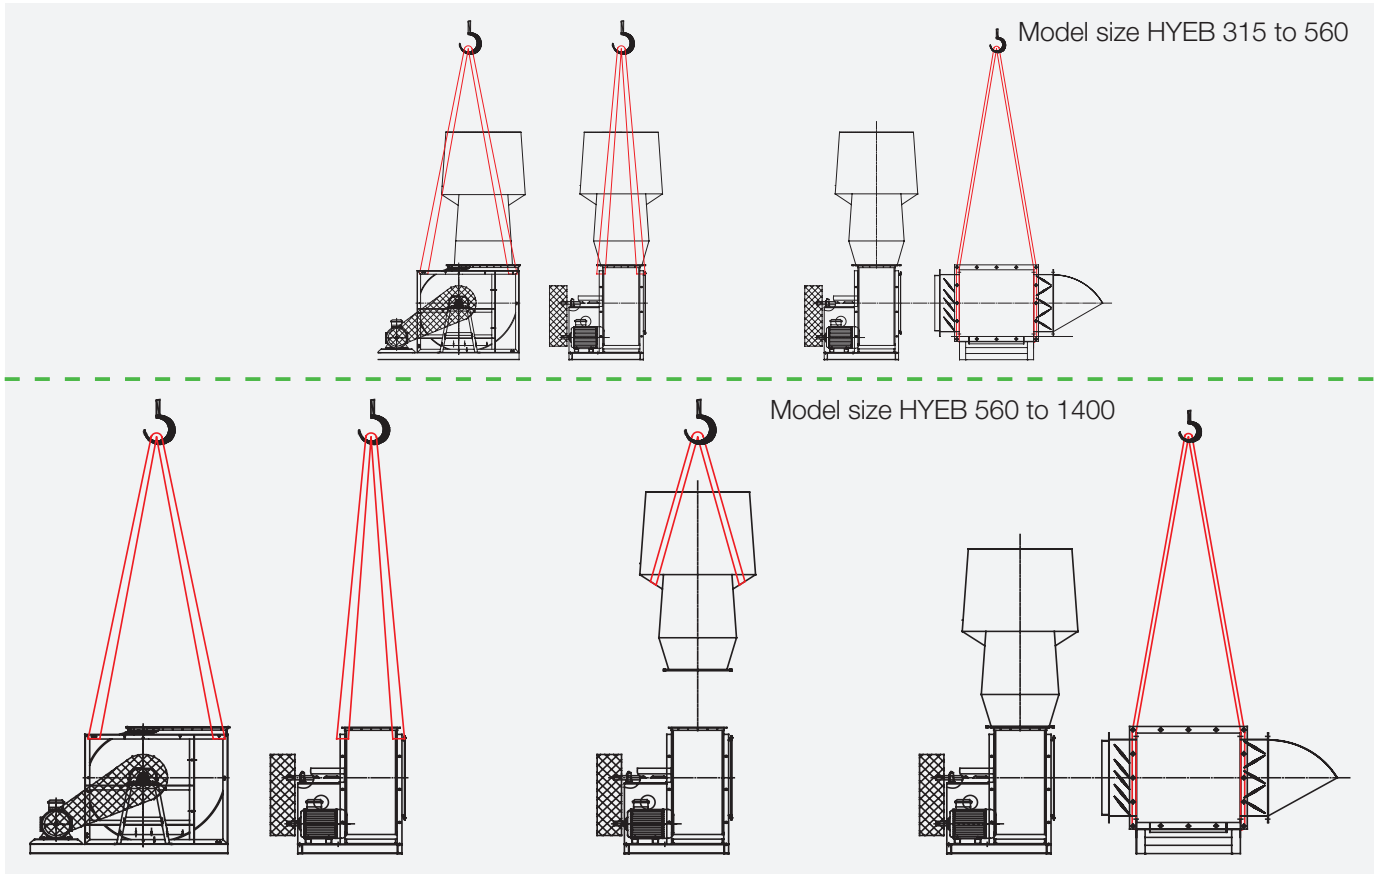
Lifting Using the Mounting Brackets - HYEB Series
